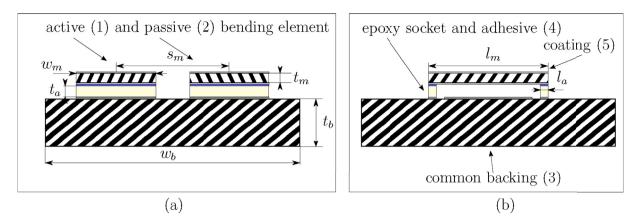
Investigated generic model with 2 bending elements on a common backing. (a) frontal view, (b) side view.
